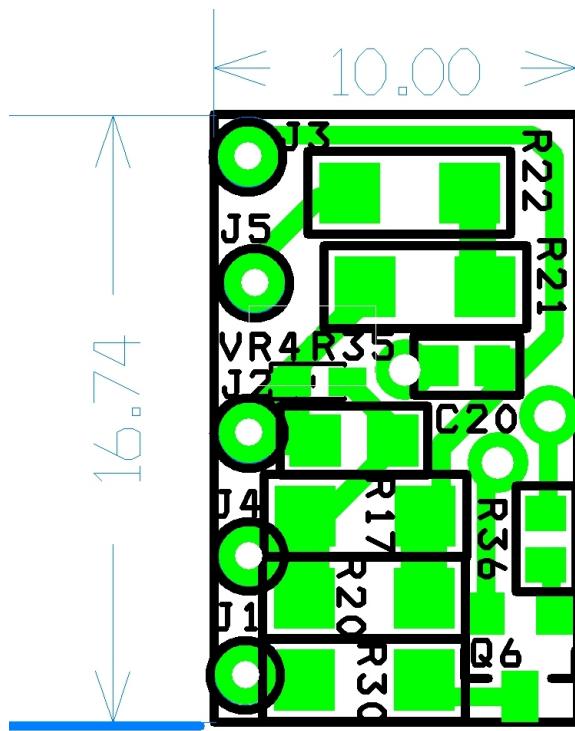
TRIAC Active Load Daughter Board PCB Layout, Top.
